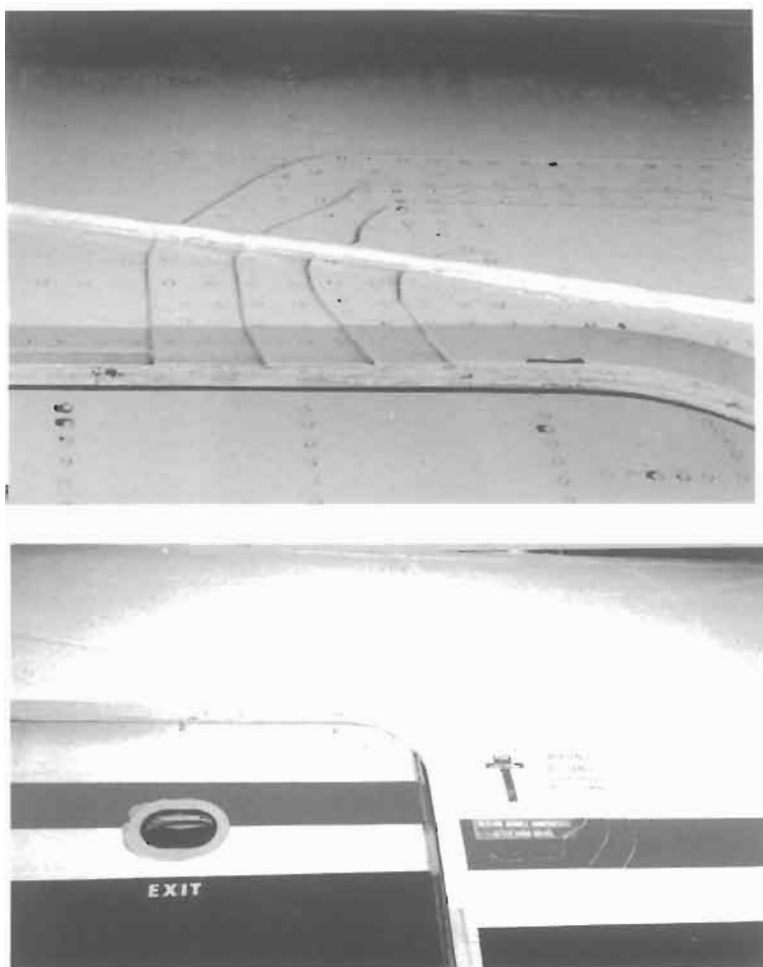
Conventional door corner repair with four, riveted metal plates; close-up view (inset) shows intricate rivet pattern and complex shape of quadrupler plates.
